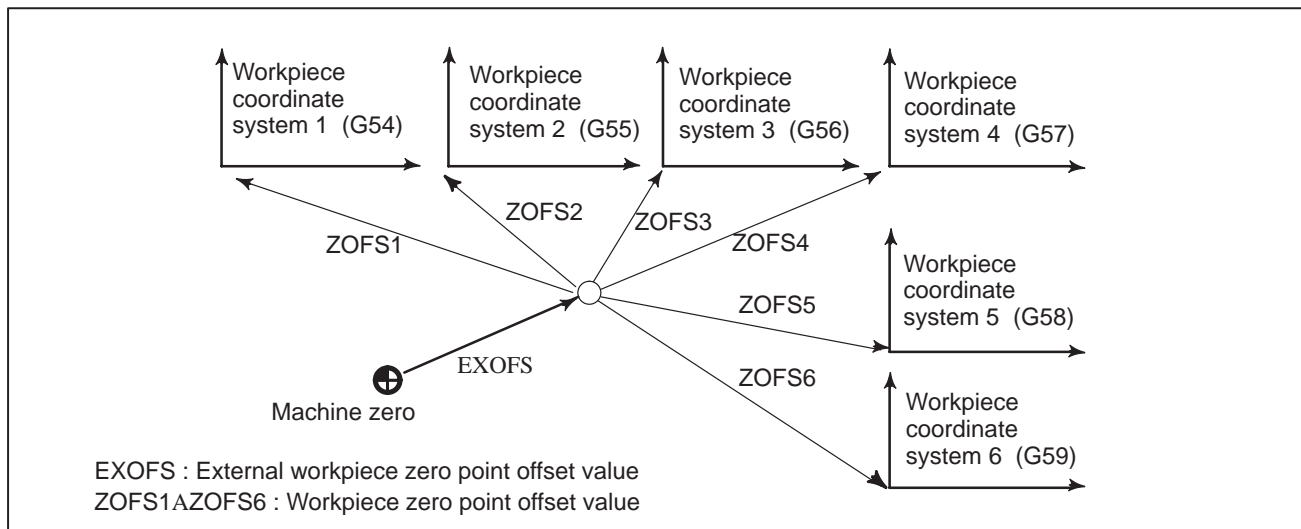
(a) Changing an external workpiece zero point offset value or workpiece zero point offset value
